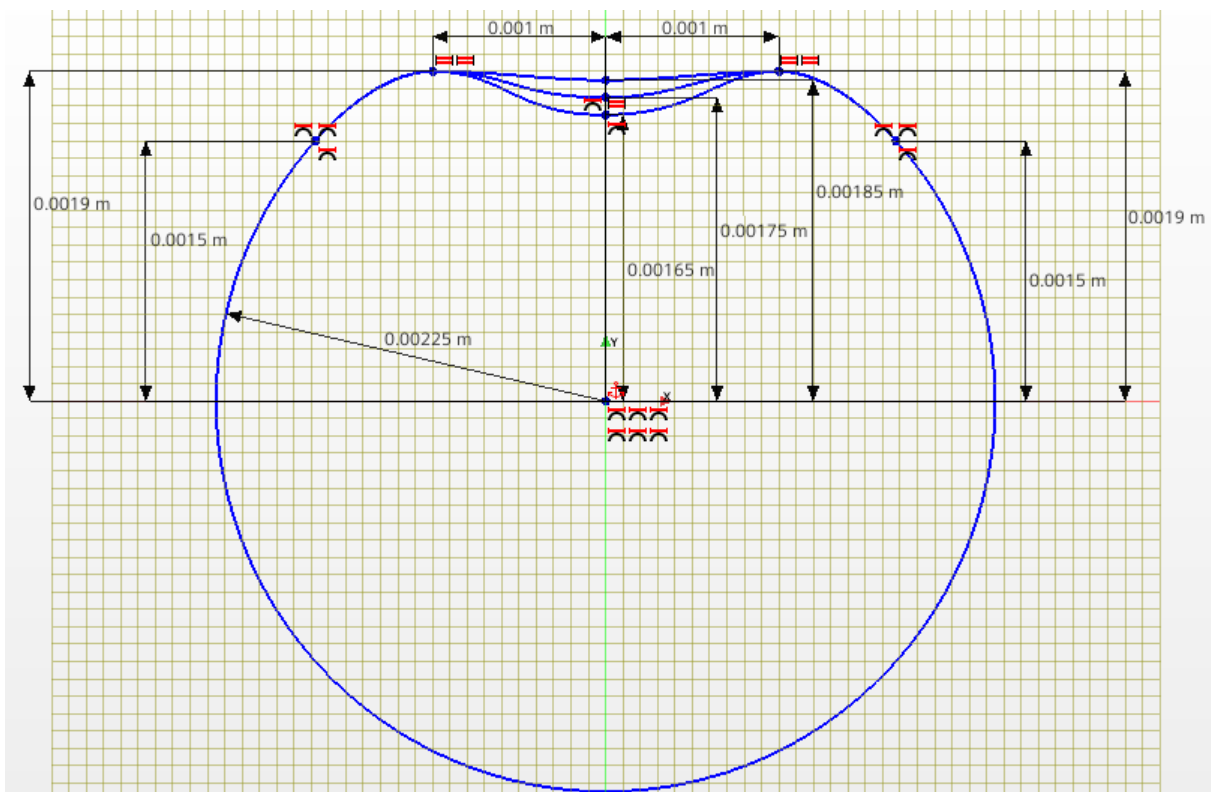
Corrugated tubes cross section and design of the corrugation height
